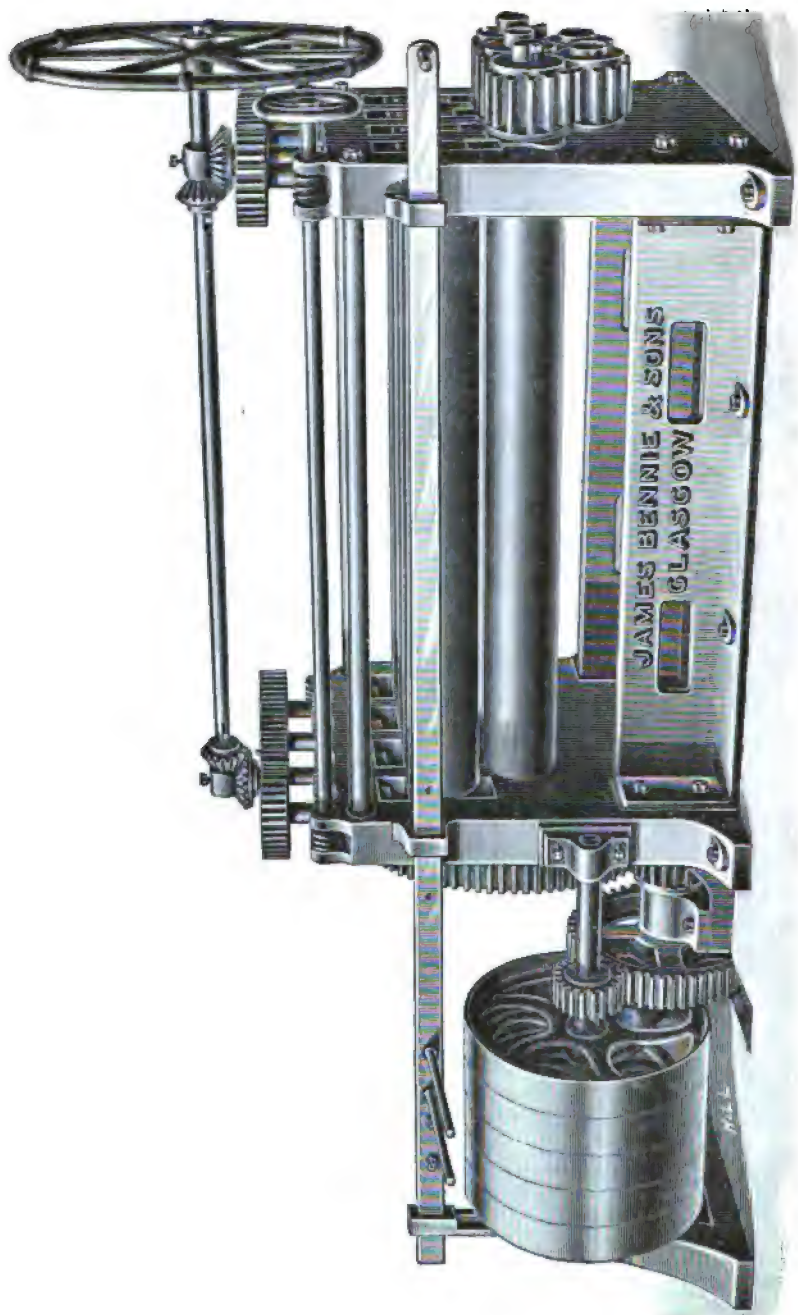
PLATE STRAIGHTENING AND FLATTENING MACHINE.
